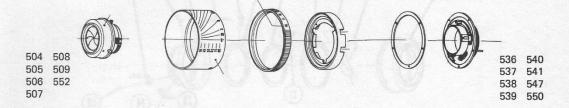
A. Diaphragm Housing Assemblies and Mount Assemblies
